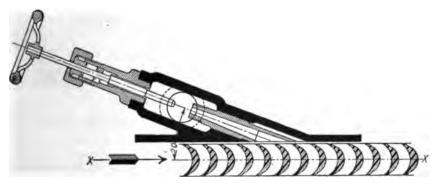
Arrangement of Steam Nozeles with Turbine Wheel of De Laval Turbine.
